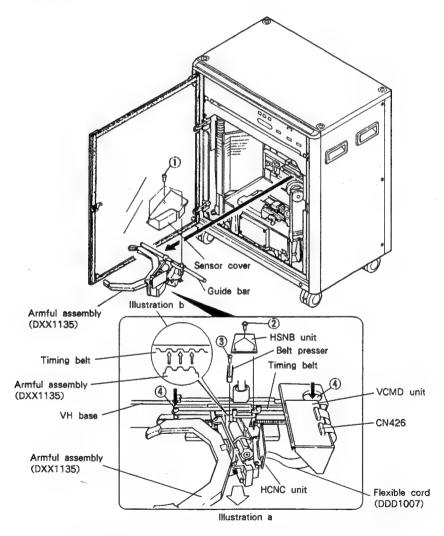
Replacement of the armful assembly (DXX1135)
